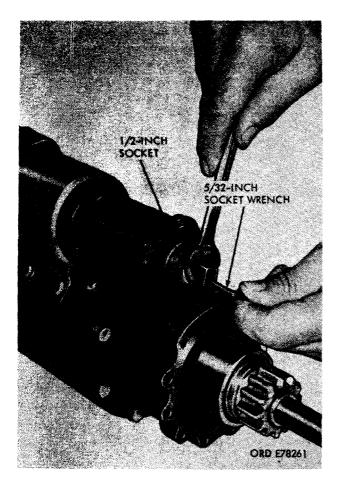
Remove or installing self-locking nut from solenoid relay shaft.
